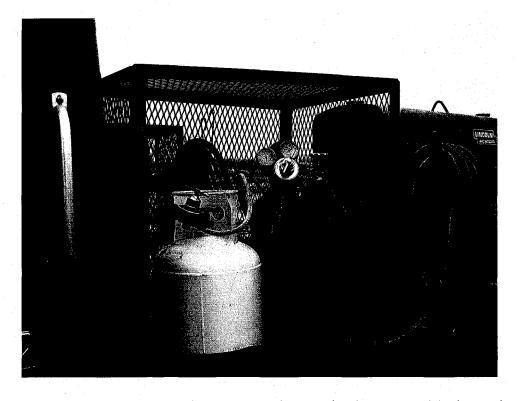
Cage around compressed gas cylinders on welder's truck
